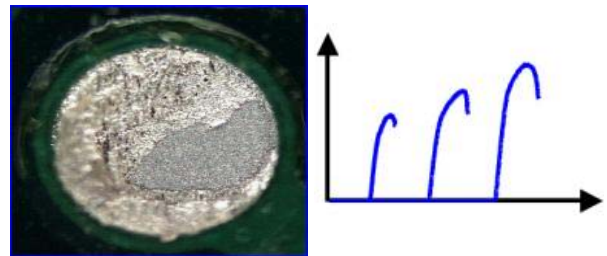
Location of fracture modes in relation to the solder ball and underlying substrates
